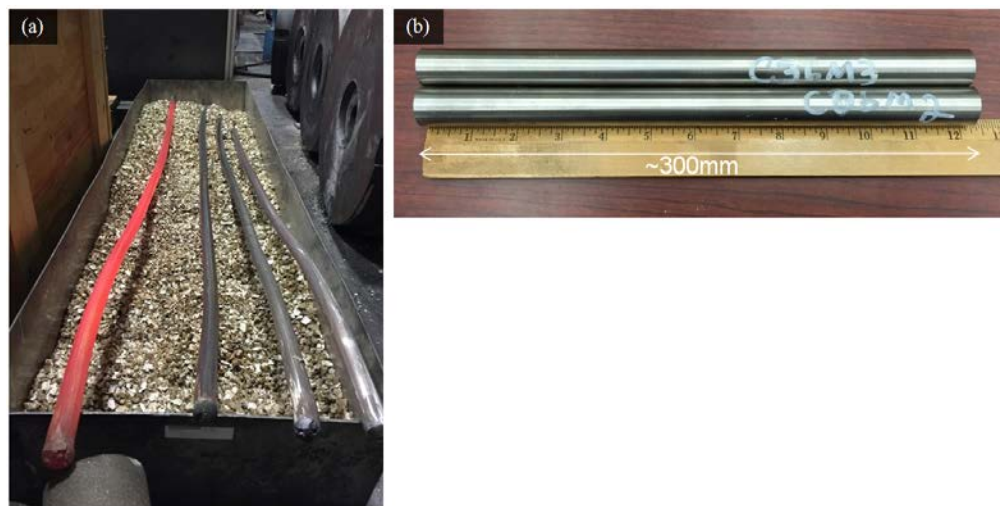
C36M3 and C06M2 extruded bars and master tubes to be tube-drawn; (a) as-extruded bars, and (c) master bars after surface grinding
